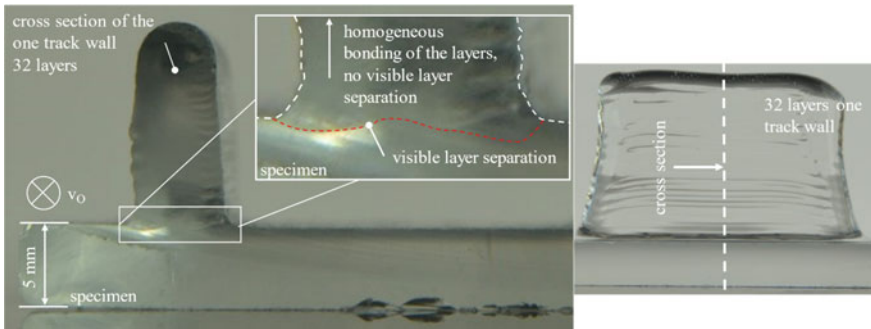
Cross-section of a borosilicate glass specimen. An one-track wall with 32 layers is applied to the specimen. There is a visible layer separation at the transition between the specimen and the structure
